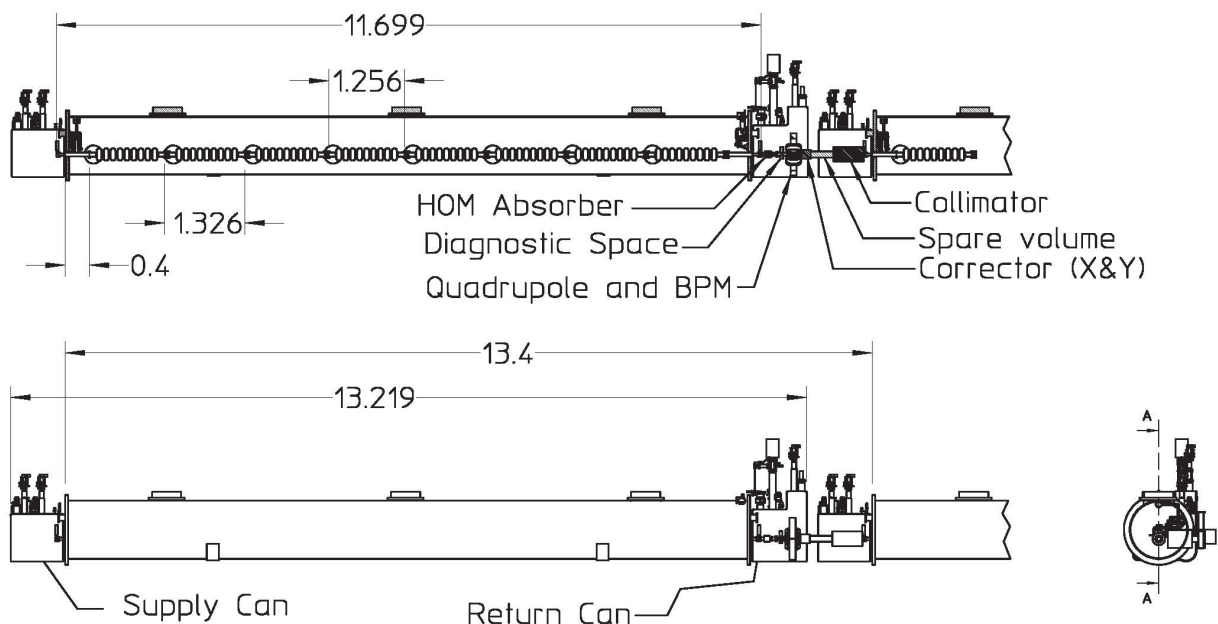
Engineering layout of the NGLS cryomodule concept, dimensions in m.
